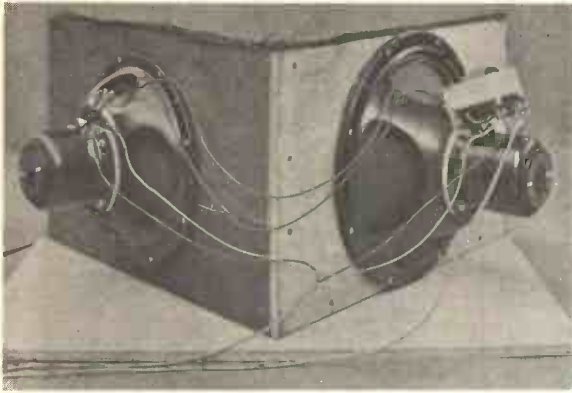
DETAILS OF THE LOUD SPEAKER WIRING.
